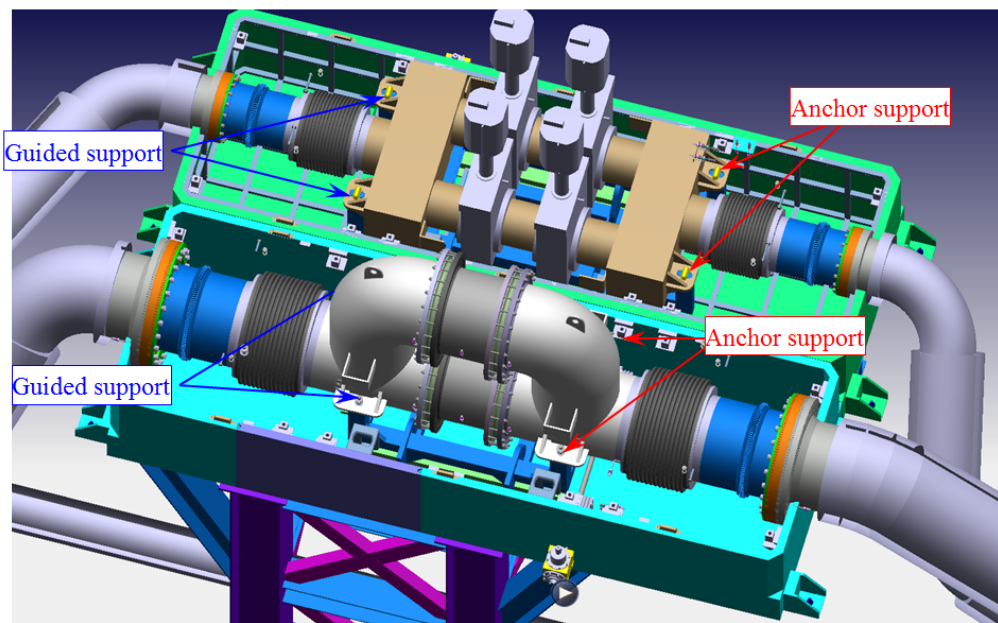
RD/BV Assemblies - Design boundary conditions
